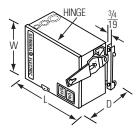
Door hinges at top.All dimensions are shown over largest part of plug.
